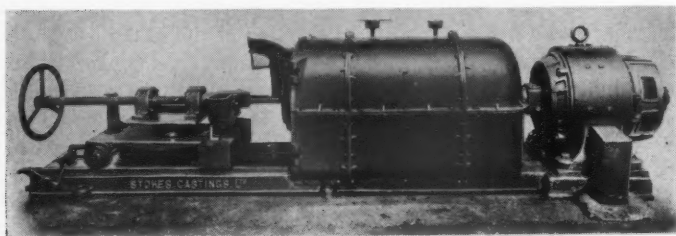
A SMALL TYPE CENTRIFUGAL CASTING MACHINE.
